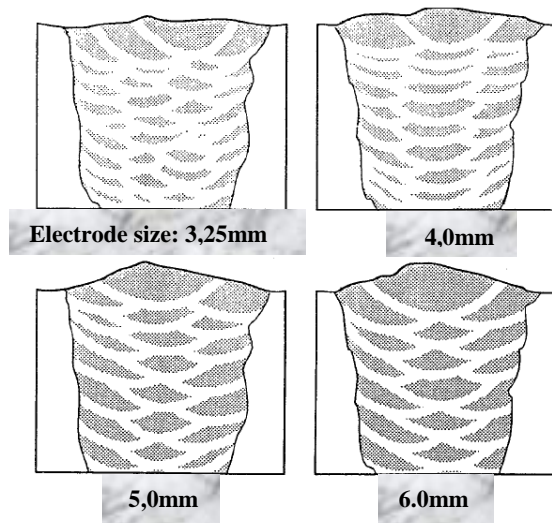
Effect of electrode size on weld metal in multipass welding. Cross sections as a function of weld diameter, white areas represent re-austenitised and tempered weld metal [27].
